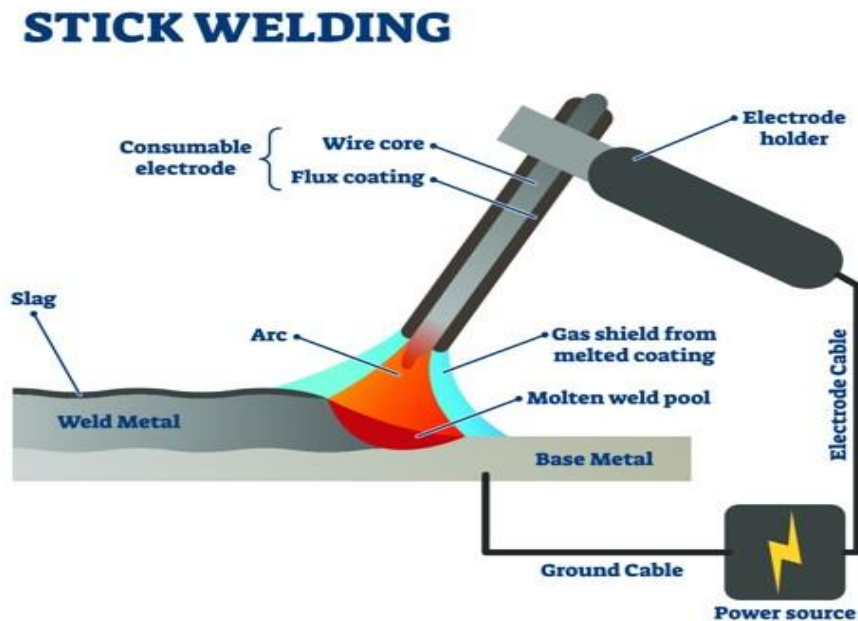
Shielded Metal Arc Welding Process.
